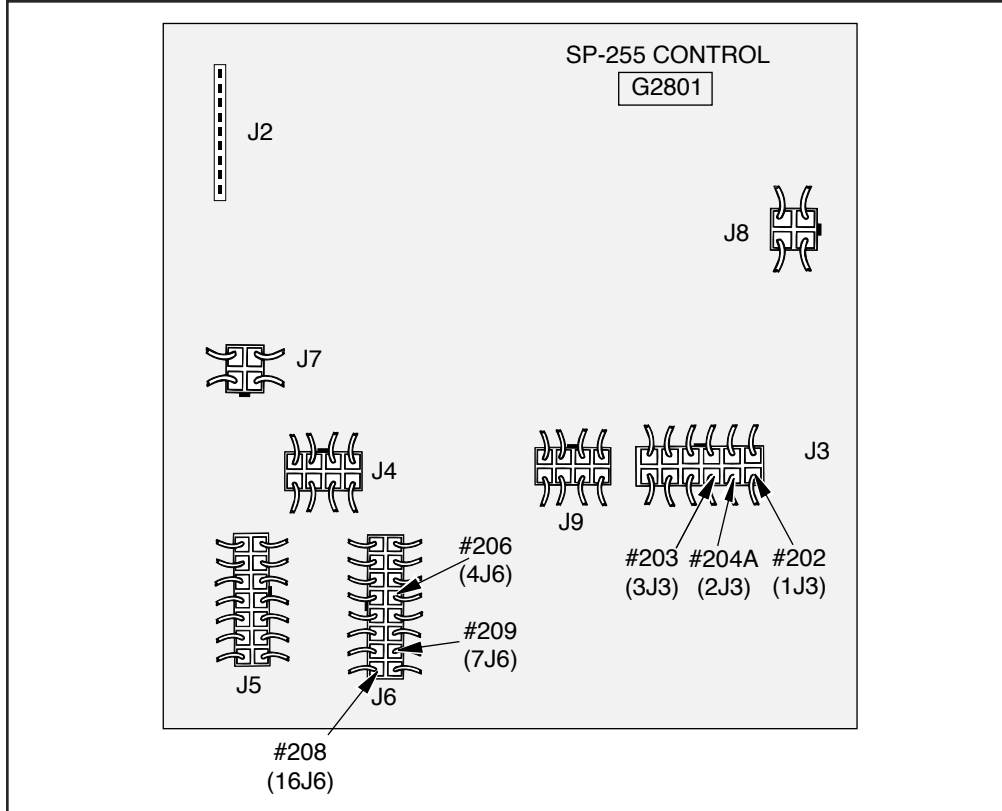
G2801 Control PC Board Main Transformer Test Points.
